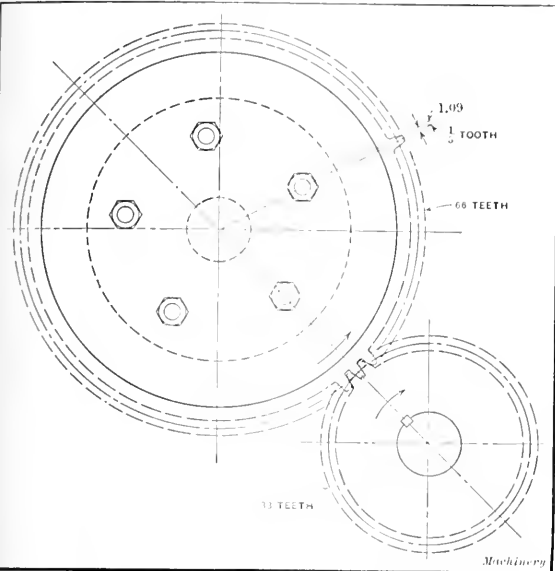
Diagram illustrating Method of adjusting Cam-shaft Gear with Five Bolt Holes
